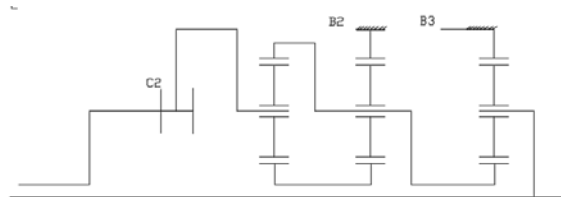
Schematic diagram of 2nd gear of the planetary transmission mechanism
